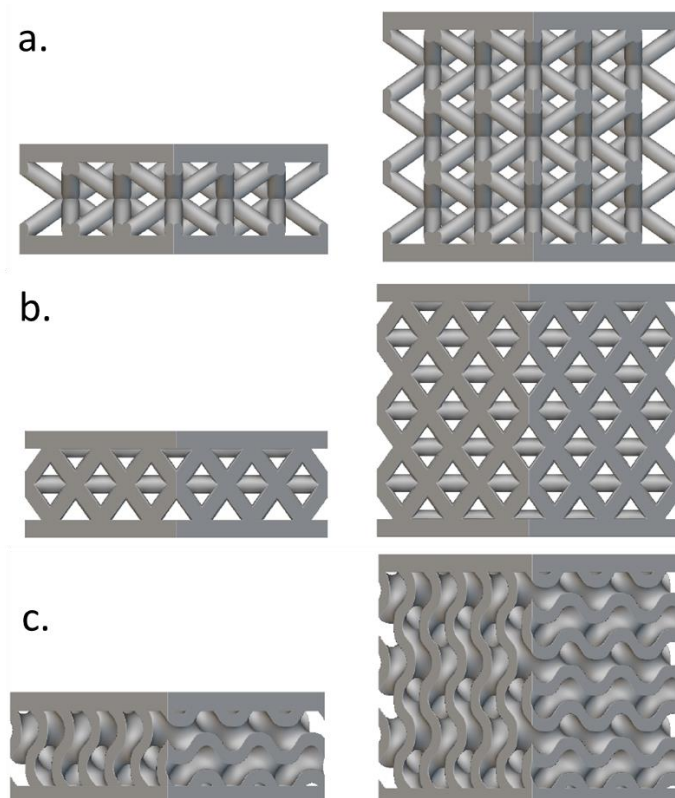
(a) BCC Compressive Specimen Design: Single Cell Layer (left) and Three-Layered Cell (right), (b) Octet Compressive Specimen Design: Single Cell Layer (left) and Three-Layered Cell (right), (c) Gyroid Compressive Specimen Design: Single Cell Layer (left) and Three-Layered Cell (right).
